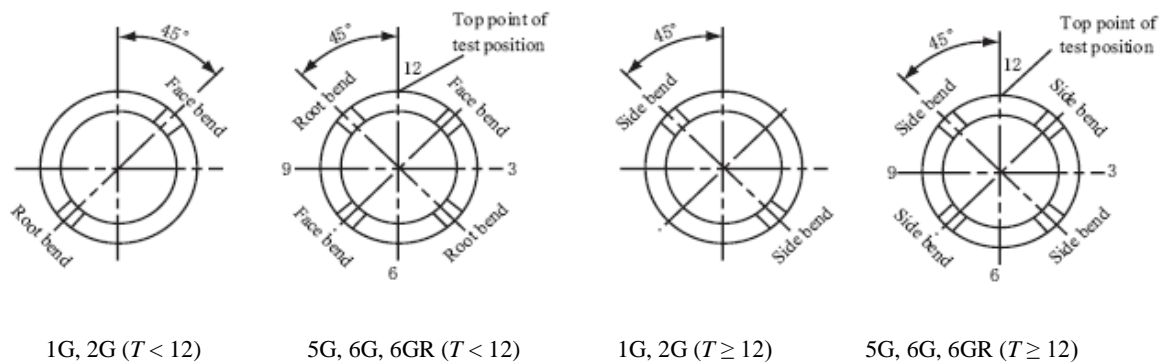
(a) Sampling Position of Bend Test Specimen for Butt Weld Joints of Pipes (Initial Qualification Test)
